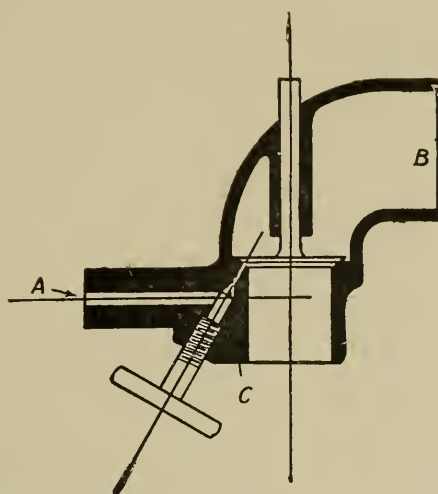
A*. Petrol inlet to Controller. *B*. Inlet pipe to Engine. *C*. Needle valve to regulate flow of petrol.
